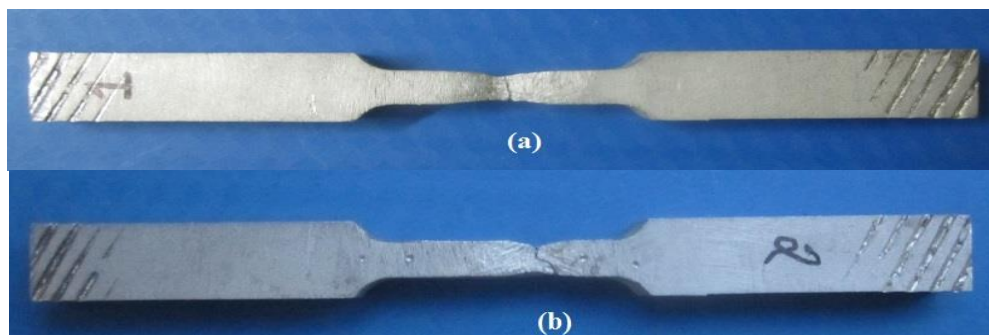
Failed Tensile Test Specimen of 2205 Duplex stainless steel (a) GTAW (b) A - GTAW
